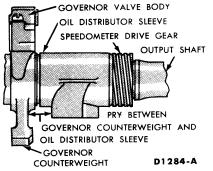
Pressure Apply Area for Removing Speedometer Gear
